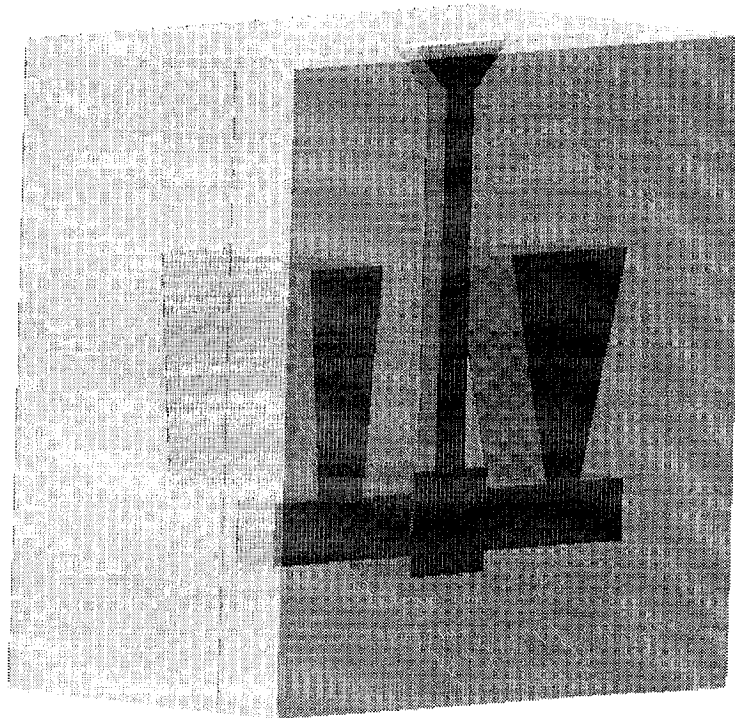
The model used to simulate the casting and the H13 tool steel permanent mold
